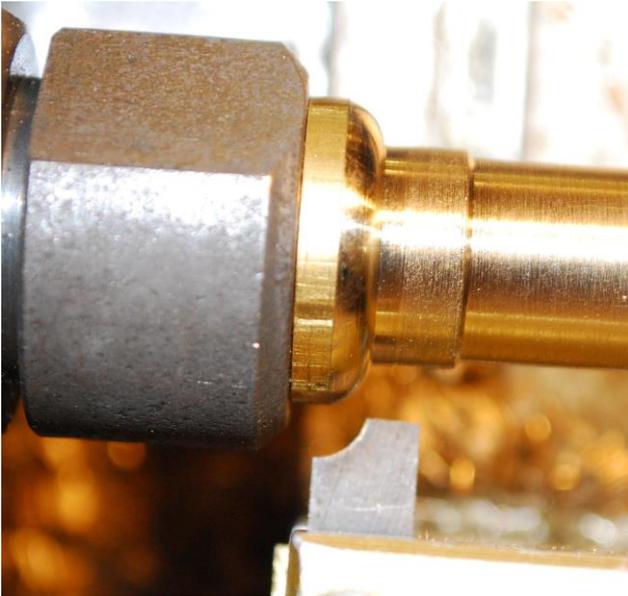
A form tool is used to radius each end. The lathe can be turned by hand if necessary to shave off material to leave a fine finish. The tool must have all grinding marks removed or grooves will be left in the finish. This tool was ground to rough shape on a bench grinder and then finished against a 1/4" diameter stone mounted in a Dremel tool.
